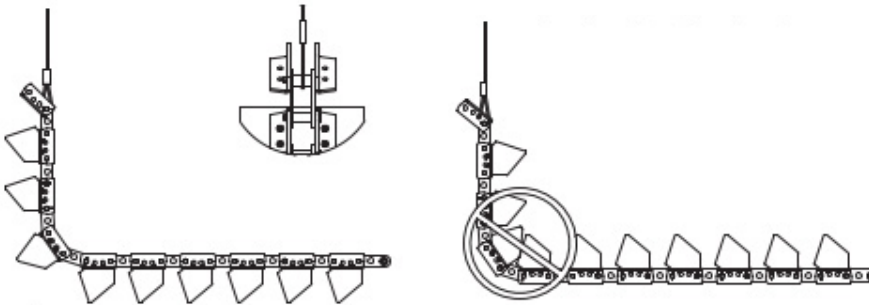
Rigging and Lifting Pre-assembled Chain and Bucket Assemblies
